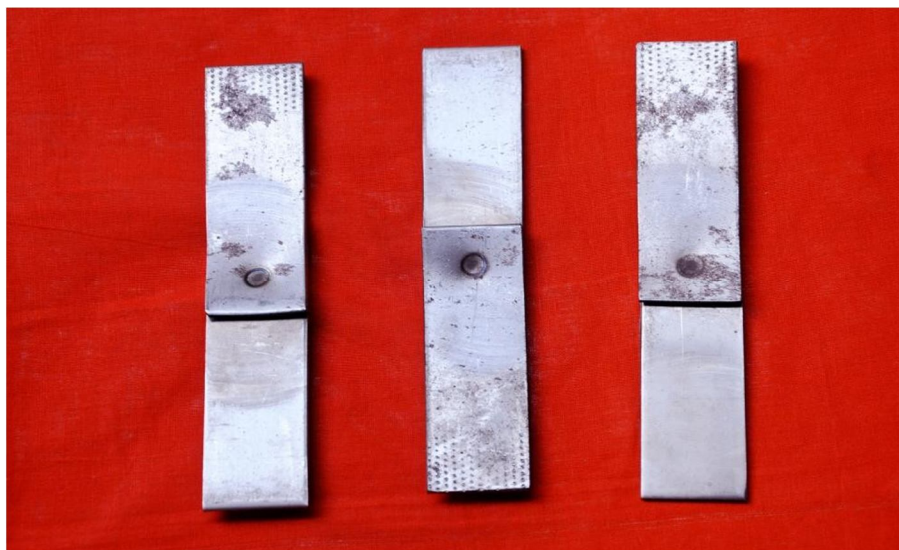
Photographic view of TSFL test samples of AIS5052 Similar joints before testing
